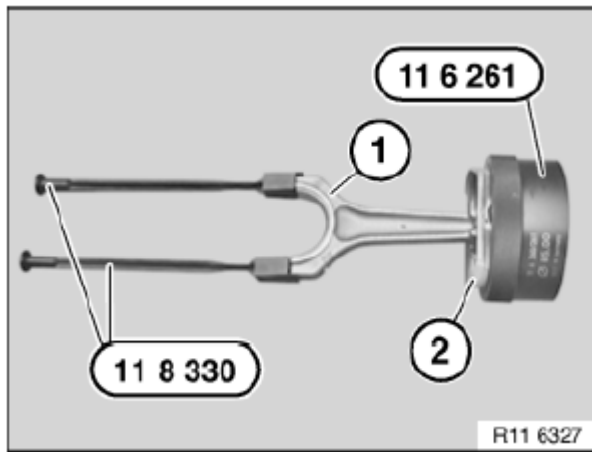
Identifying Special Tool (11 8 330), (11 6 261), Piston And Conrod
